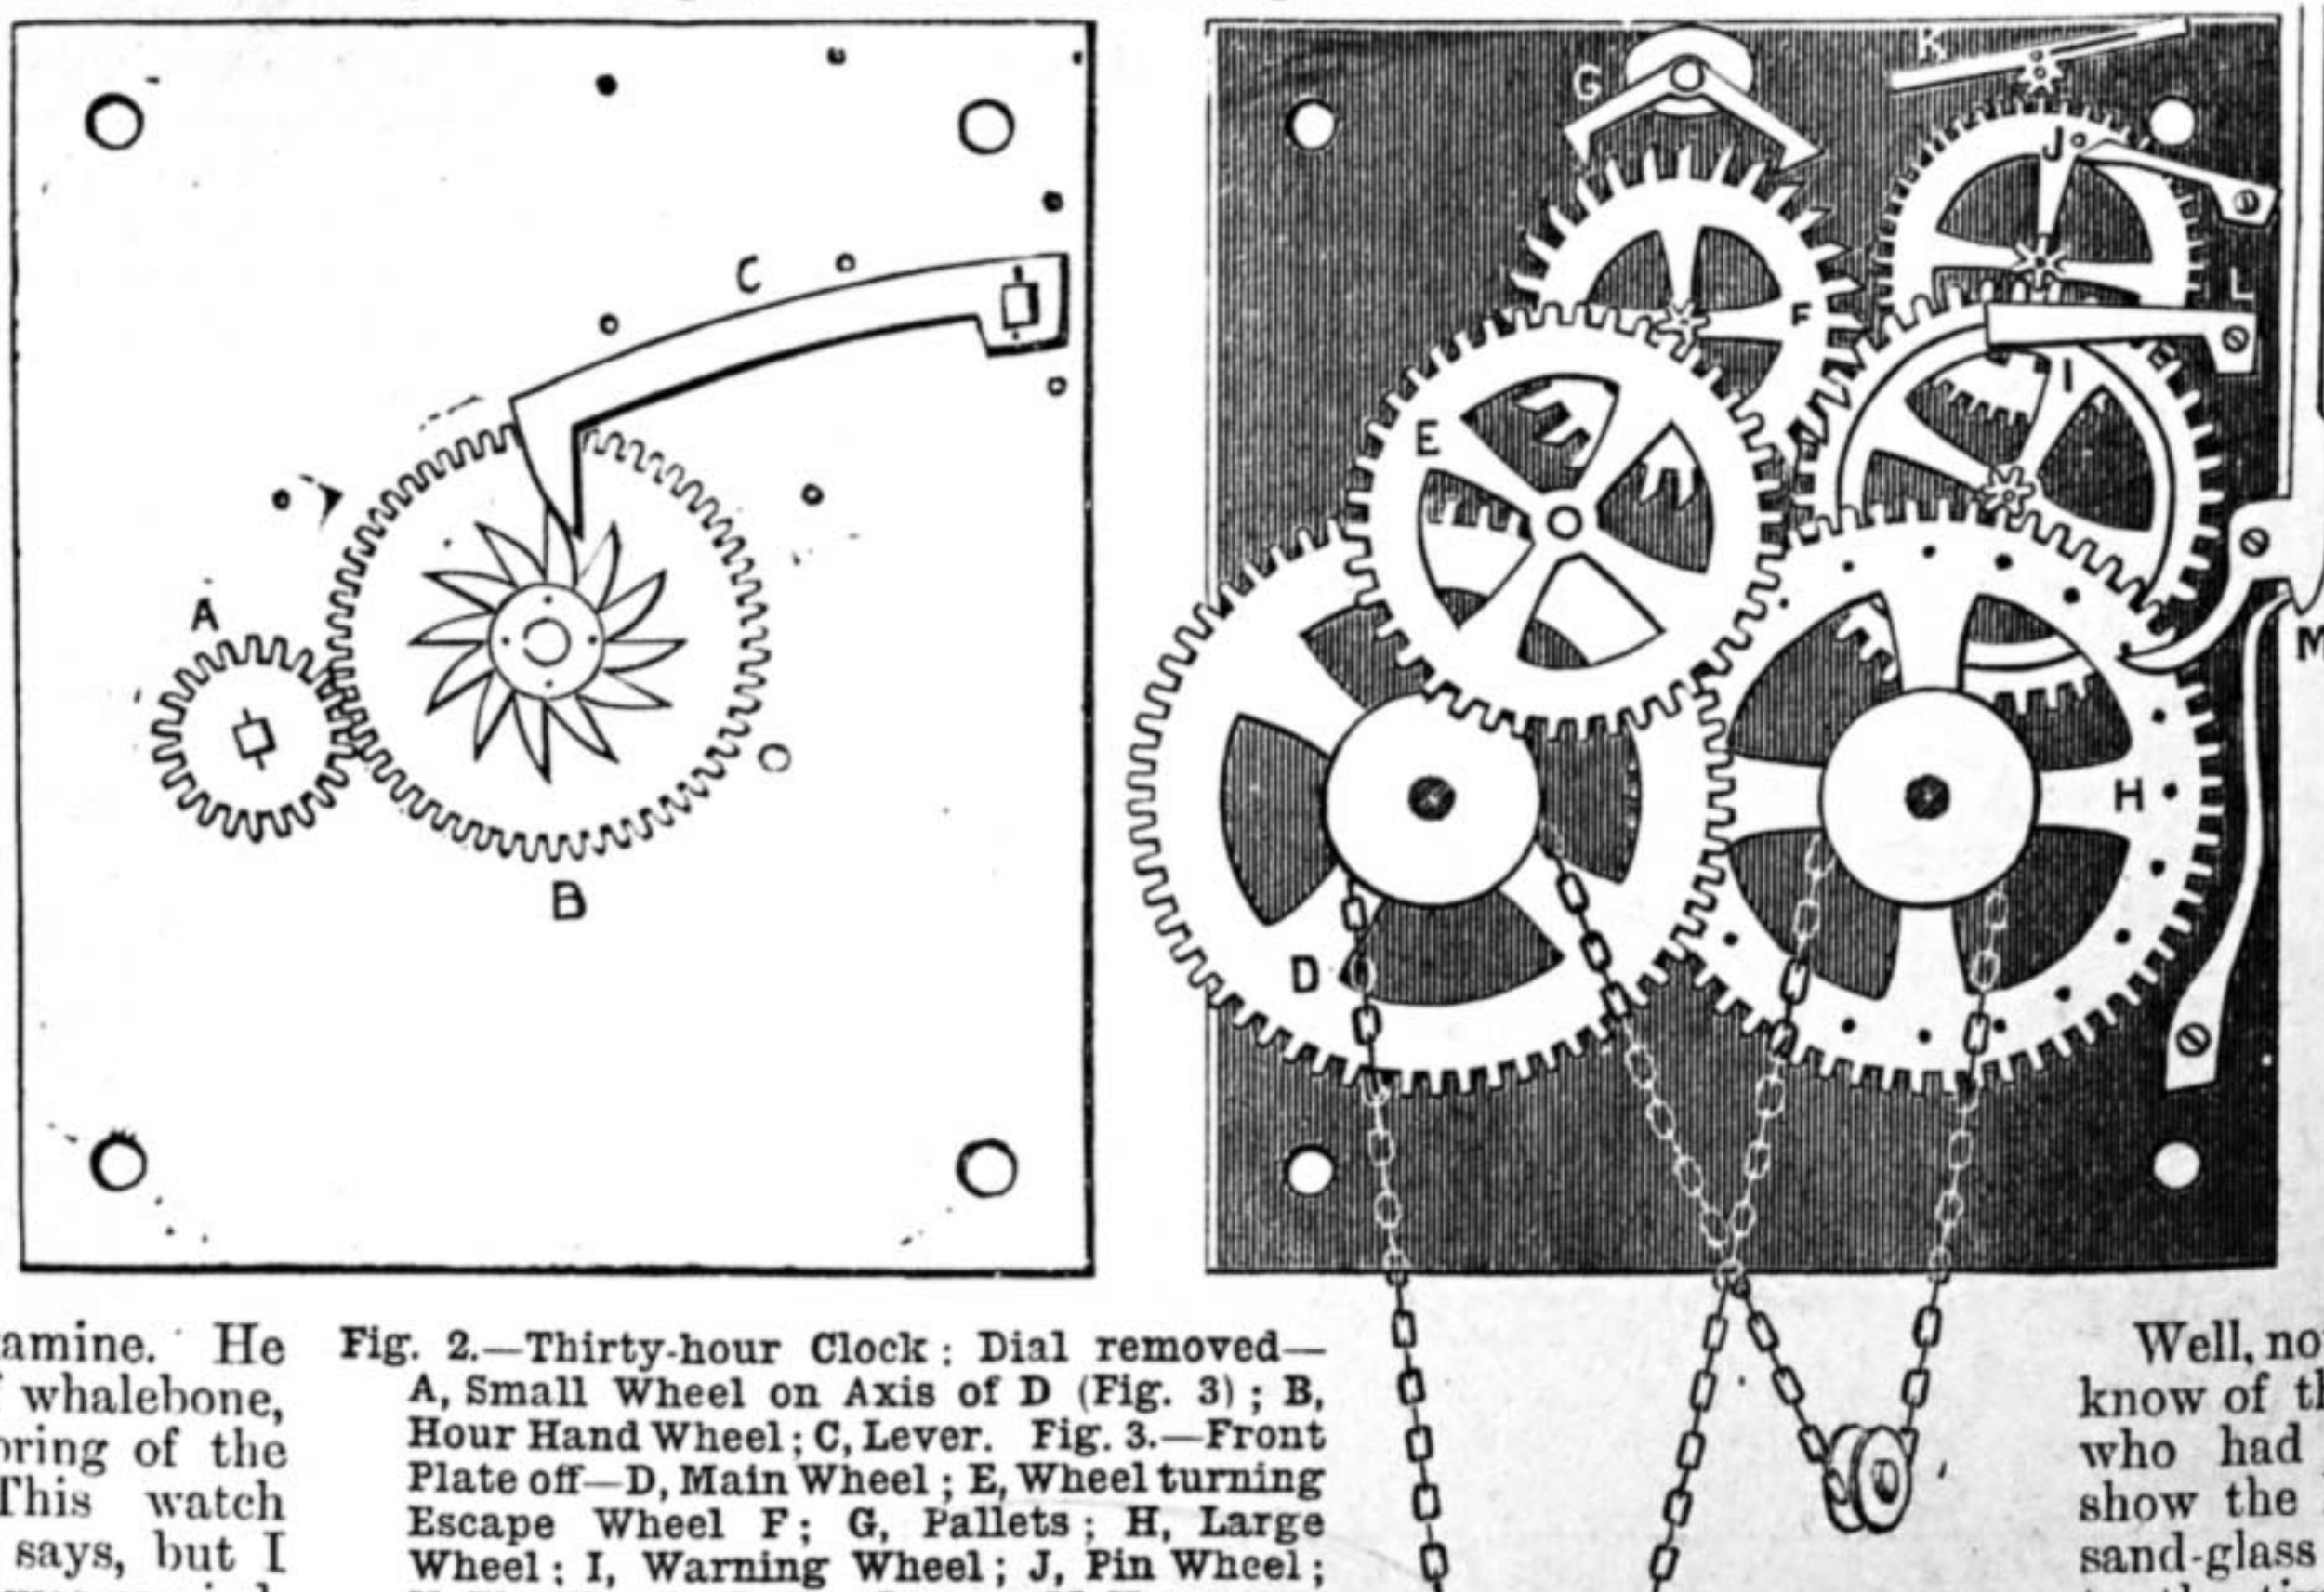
Thirty-hour Clock: Dial removed—A, Small Wheel on Axis of D (Fig. 3); B, Hour Hand Wheel; C, Lever. Fig. 3.—Front Plate off—D, Main Wheel; E, Wheel turning Escape Wheel F; G, Pallets; H, Large Wheel; I, Warning Wheel; J, Pin Wheel; K, Fly Wheel; L, Top Lever; M, Hammer.
